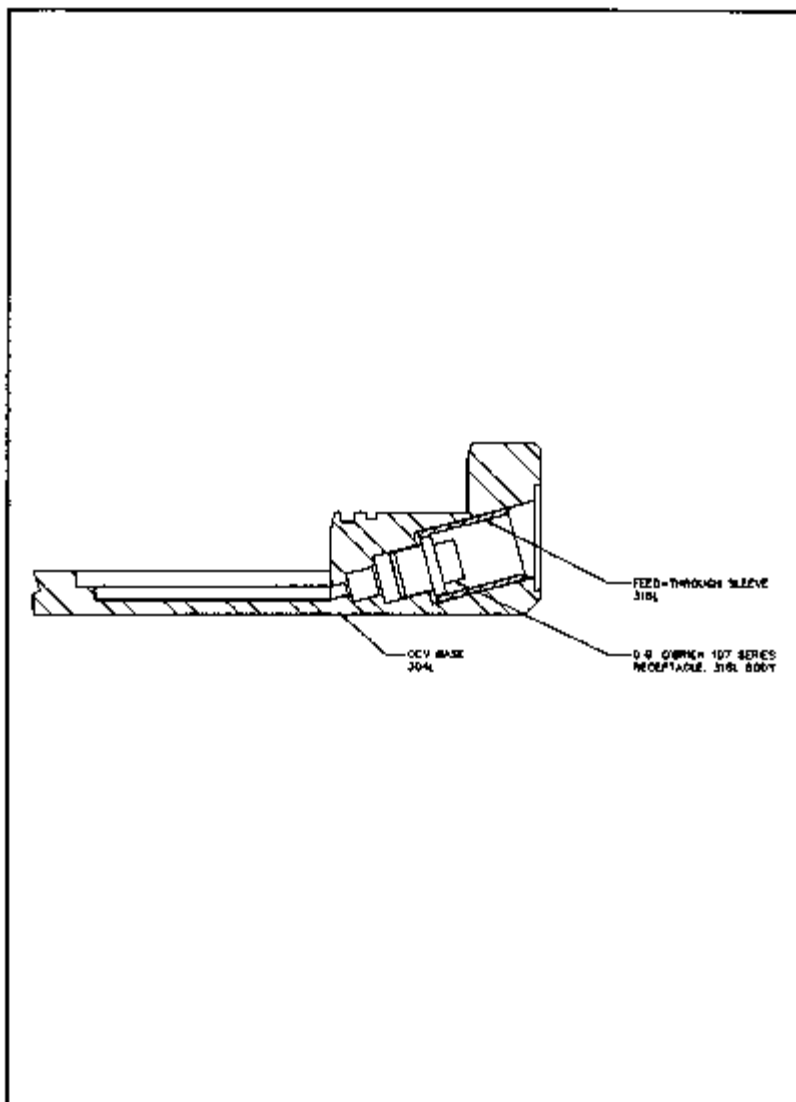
,2-5. OCV Feed-through Containment Boundary Components and Welds.
